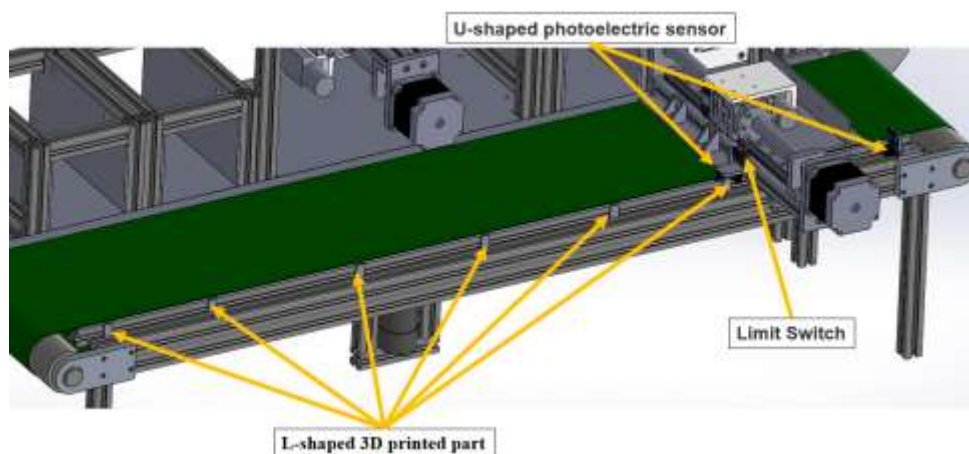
The Installation Positions of L-Shaped 3D Printed Parts and the Placement of Sensors.
